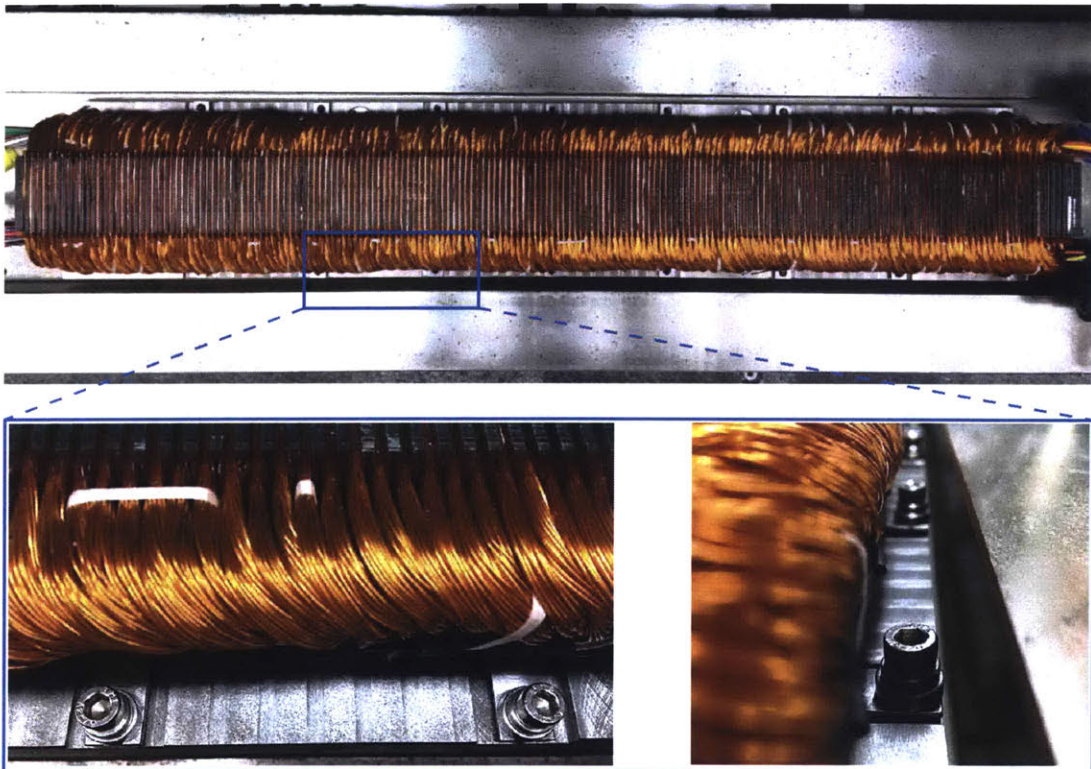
New fine-tooth stator mounted on the dynamometer. Long dove-tail inserts are used to clamp the stator down on the mounting plate.
